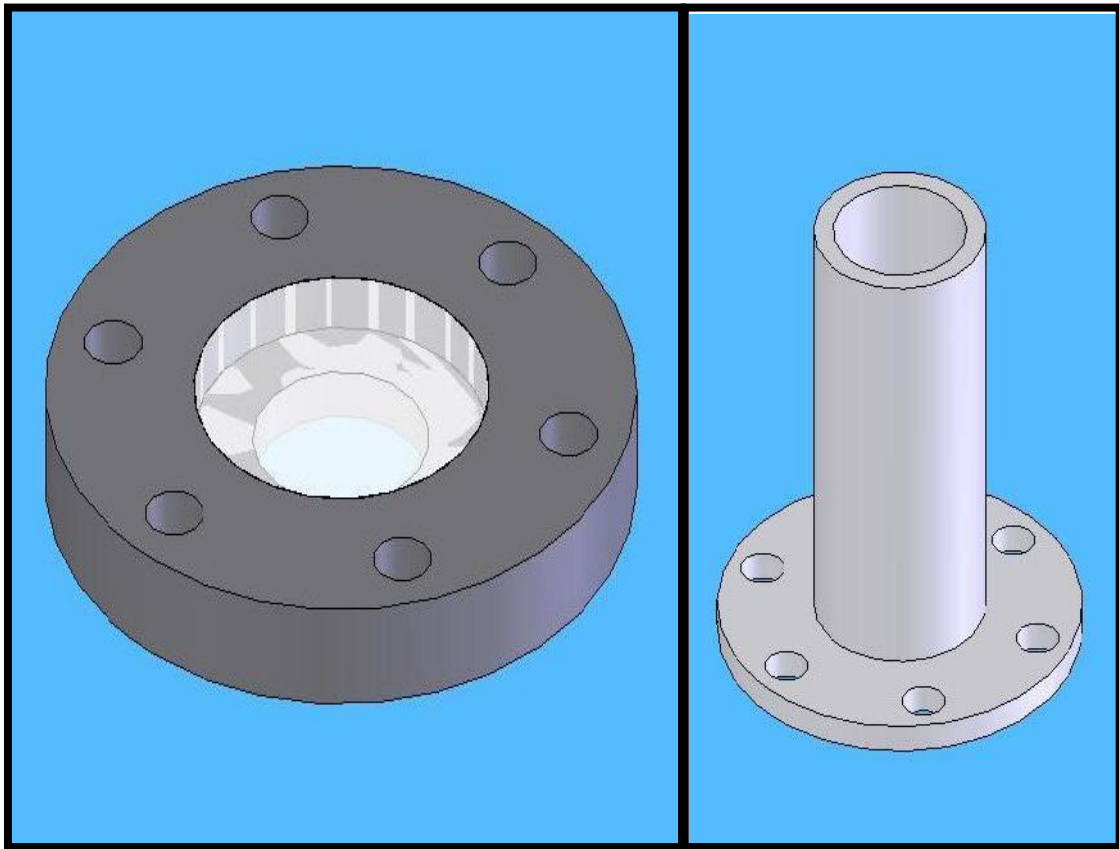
Solidworks part drawing of disc (left) and shaft (right) for top window of microwave furnace.
